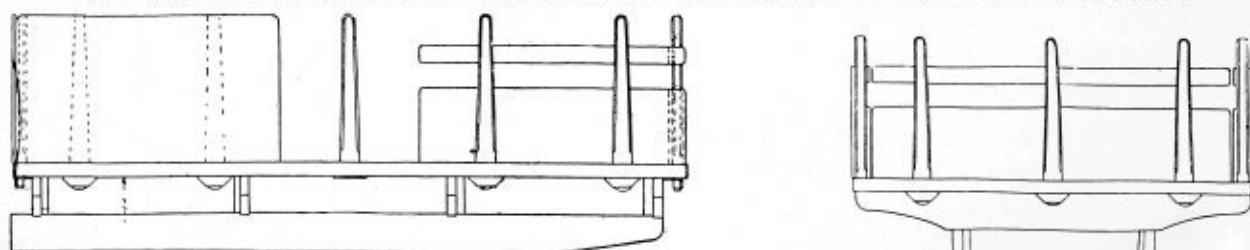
SIDE AND REAR ELEVATIONS OF A STANDARD STAKE BODY DESIGNED FOR A SHORT WHEELBASE CHASSIS
